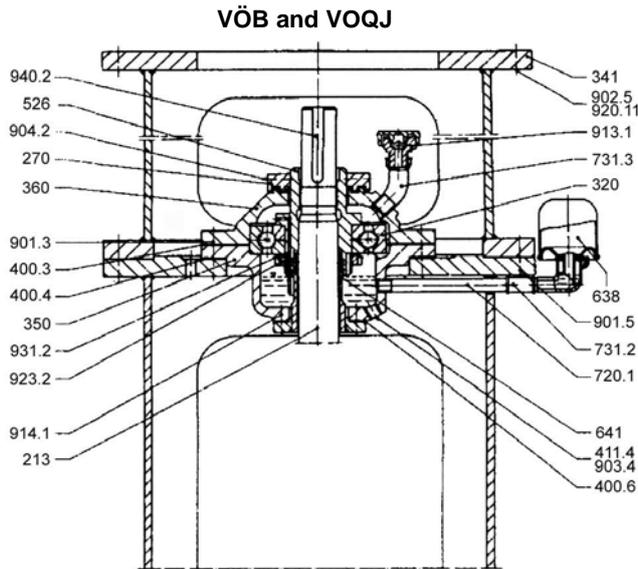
Construction of support bearing VÖB (deep groove ball bearing and VÖQJ (four point contact bearing).
